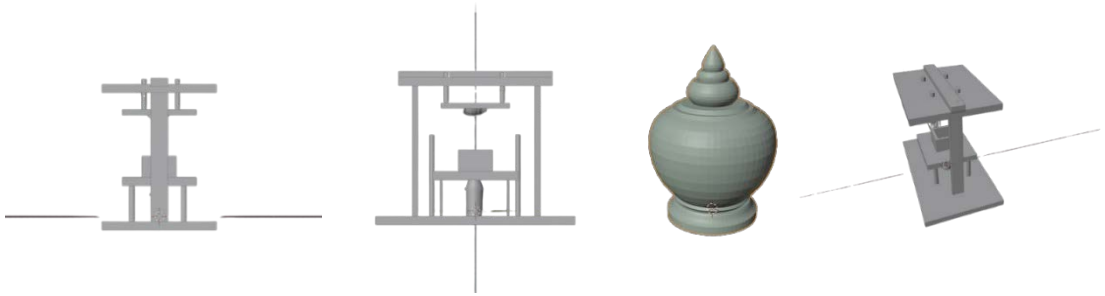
Side view of the product forming press machine (A), Front view of the product forming press machine (B), Top view of the product forming press machine (C), Image of the product mold (D)
